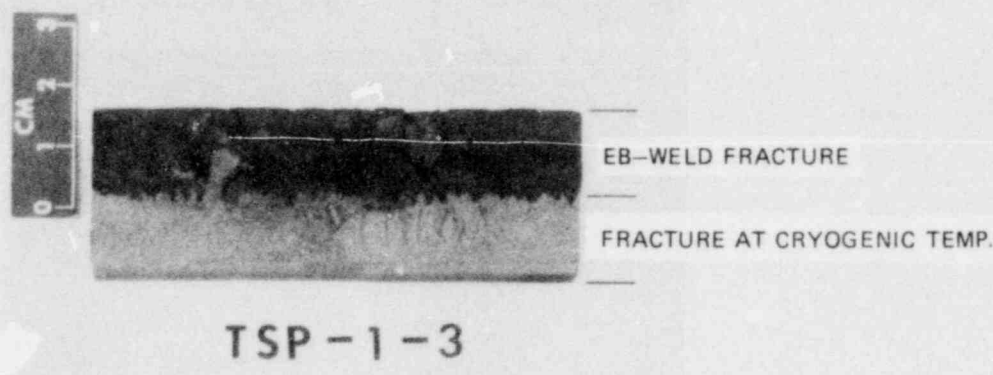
EB-weld fracture surface from test weld in TSC-1 prolongation.
